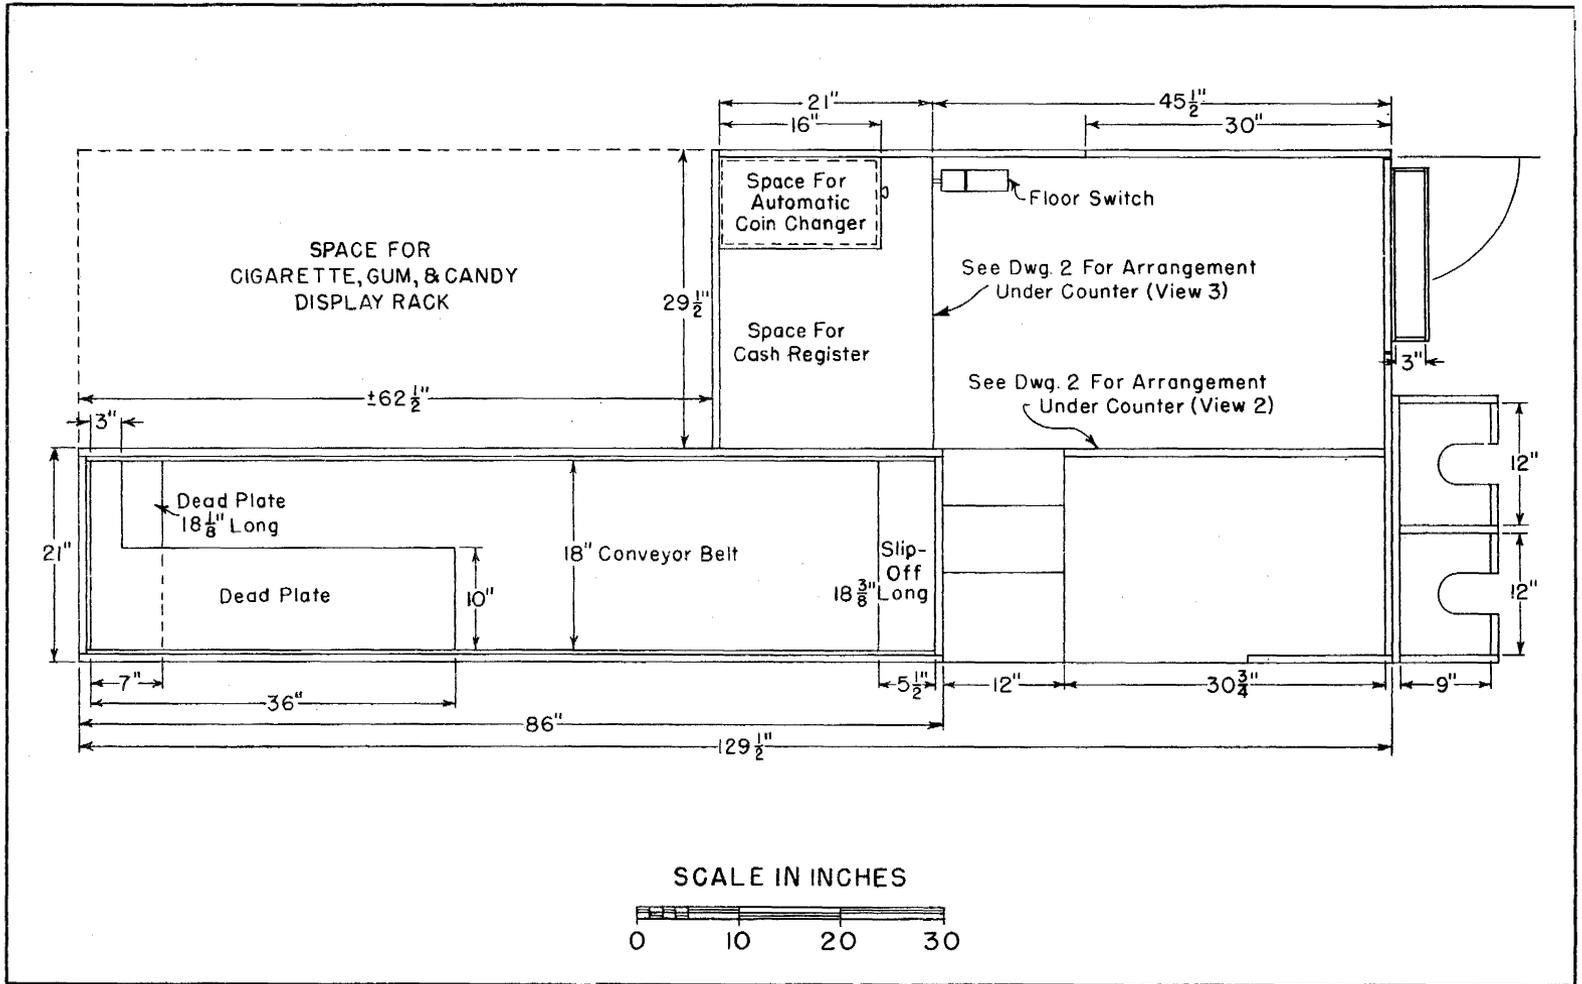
Top view of Redi-chek conveyor check-out counter.
